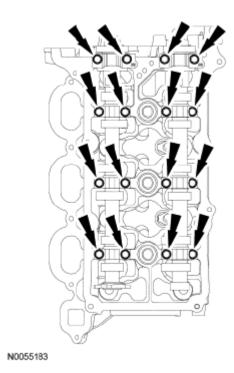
Locating RH Camshaft Bearing Caps Bolts Courtesy of FORD MOTOR CO.
